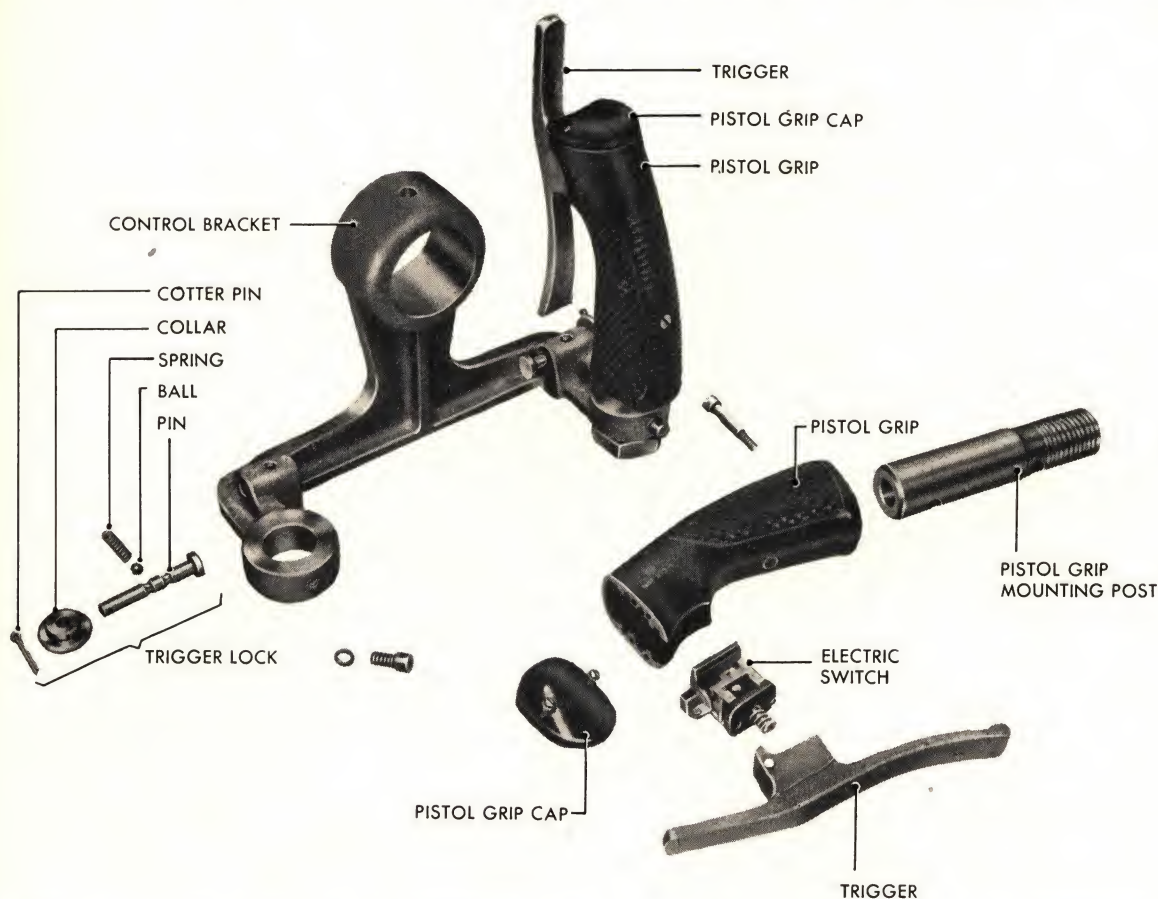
Flame Thrower Mk 1—Gun Pistol Grips, Triggers, and Trigger Locks—Partial Disassembly
